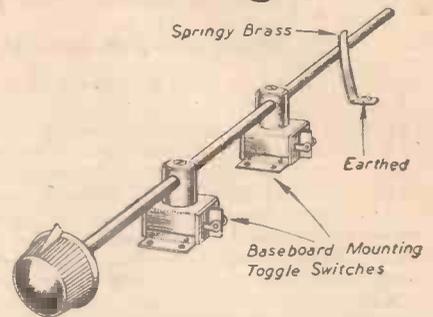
How baseboard-mounting toggle switches can be used for a circuit of the type shown in Fig. 1. Only two of the three switches are shown, but any number could be ganged together.
